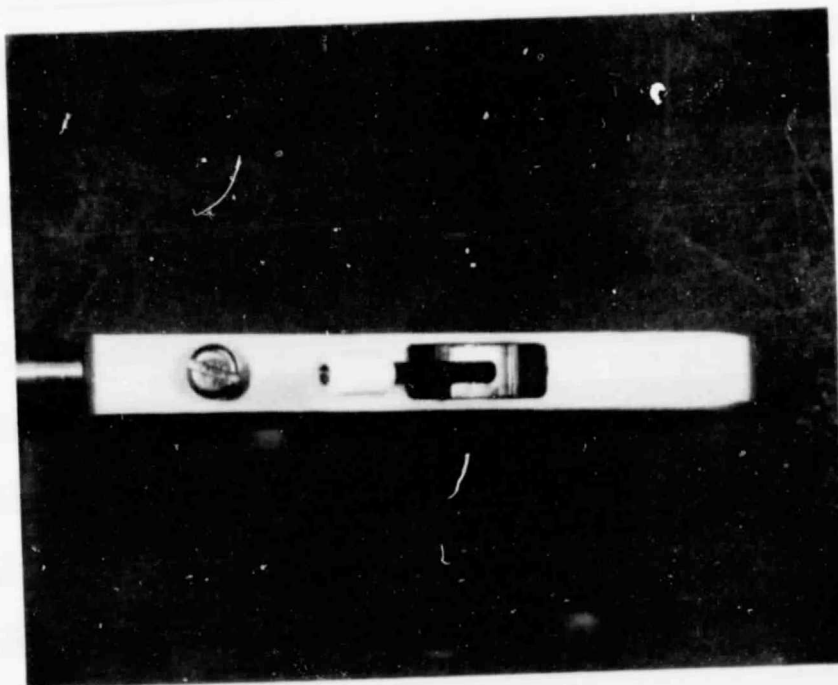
Frontal View of the Gripper Jaw of the Russtech Tool.
